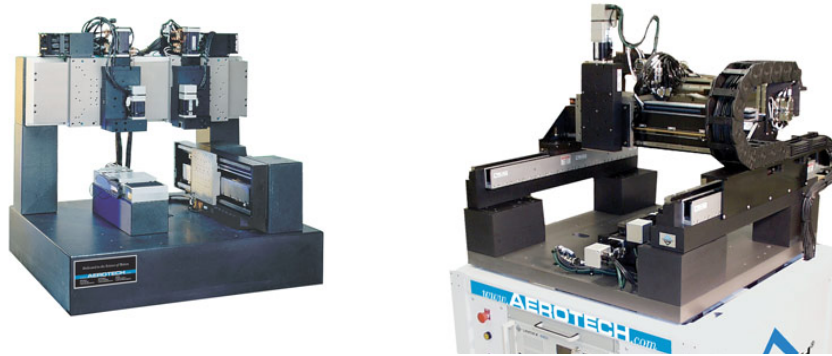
High accuracy inspection and assembly stations (Aerotech, 2010)
